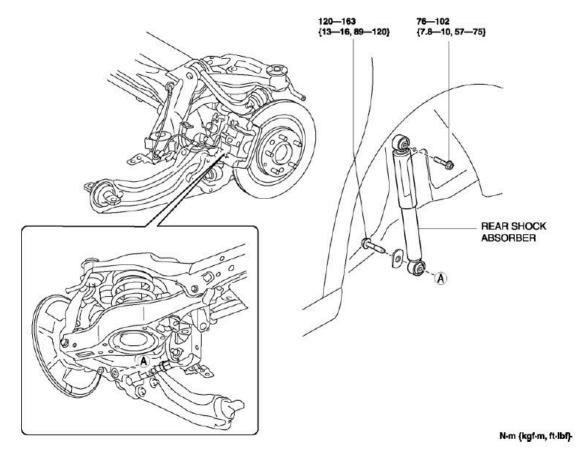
Rear Shock Absorber And Bolt With Torque Specification
